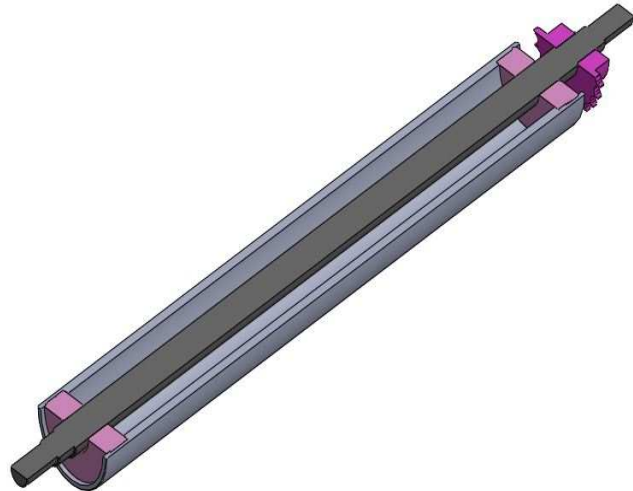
Shaft and the pipe connected by welding
